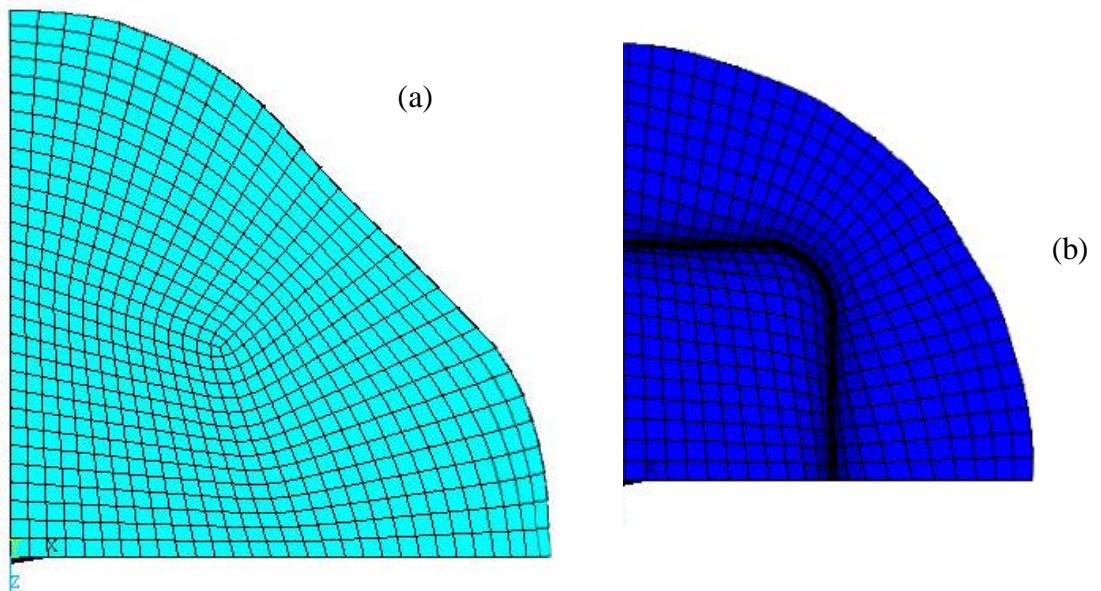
Third blank modification for circular flange (a) blank shape (b) deformed shape
